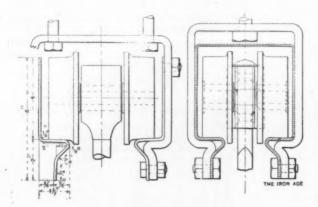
Cross Sections, Showing the Construction of the Track.
